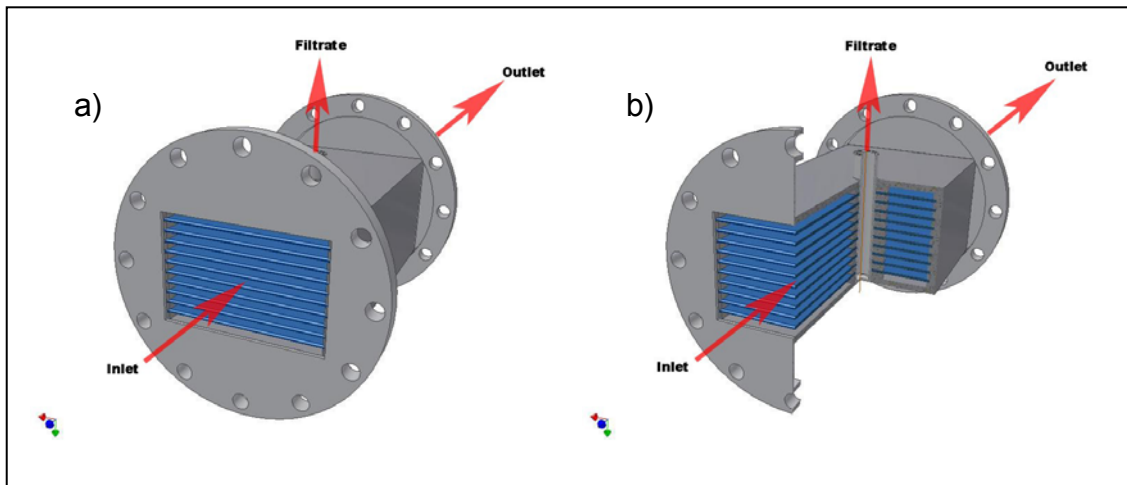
a) Alloy Filter Housing b) Cutaway Module
